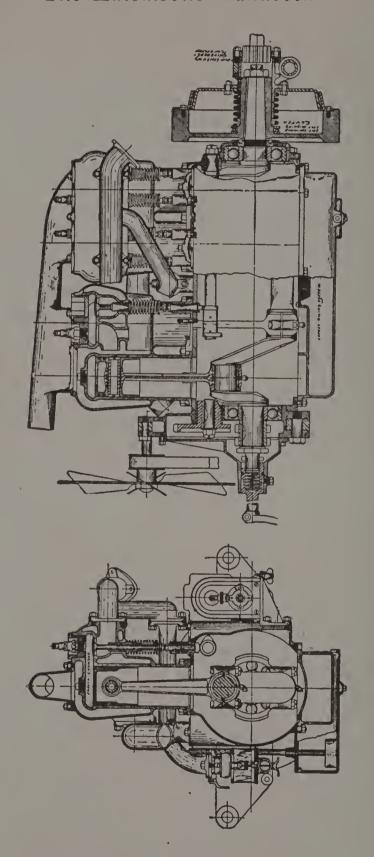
Front and Side View of Section Through Four Cylinder Automobile Engine
